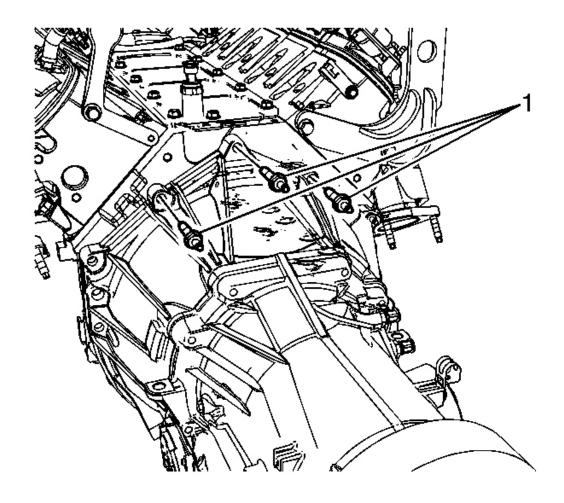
Lower Transmission Bolt/Studs Courtesy of GENERAL MOTORS CORP.
